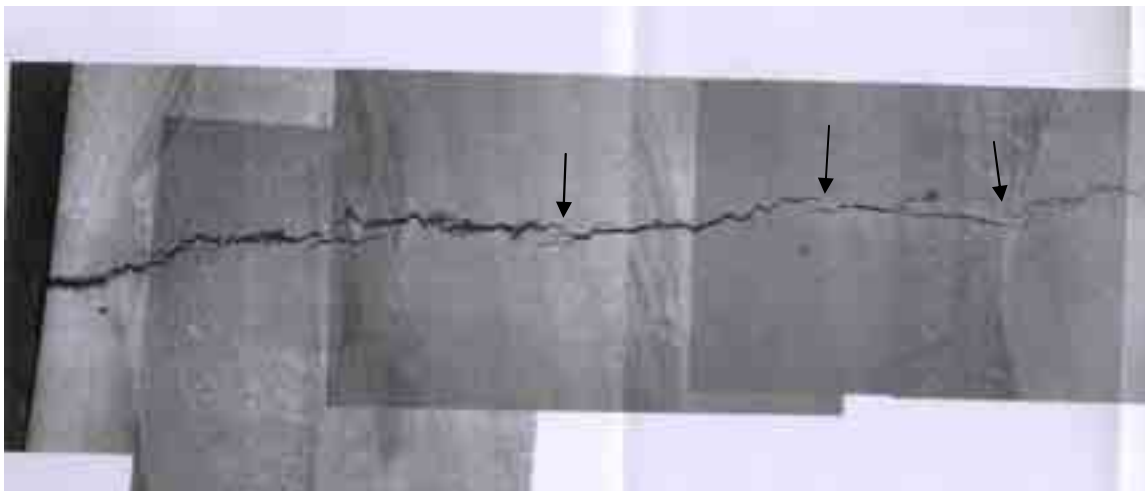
Example of IDSCC in nickel base weld metal. Apparent discontinuities marked by arrows.
